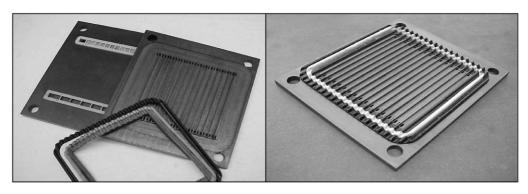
WTC1 prototype sub-assembly showing (left) the manifolding gasket, seals and bi-polar plate and (right) the assembled half-cell.
